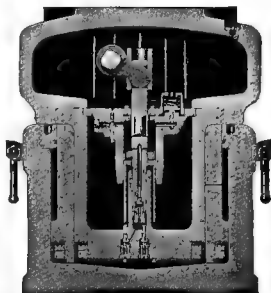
Low Type Telescope Hydraulic Jack. Duff Manufacturing Company.
